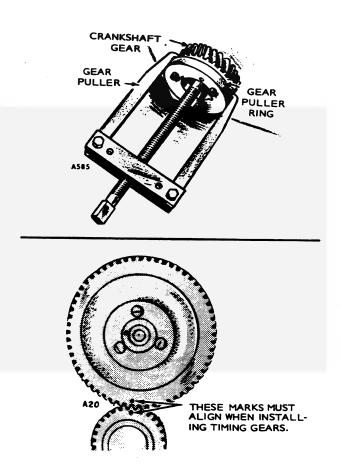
TIMING GEAR REMOVAL AND INSTALLATION
